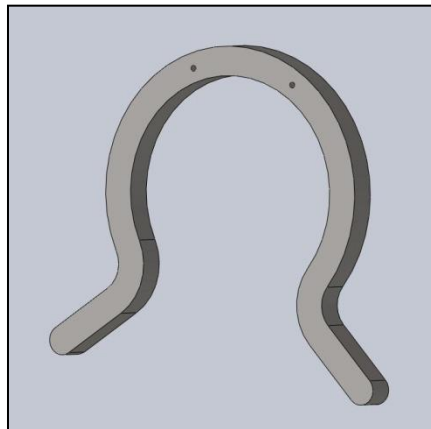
A c-retaining ring such as the one that would be used in the c-ring clip design
